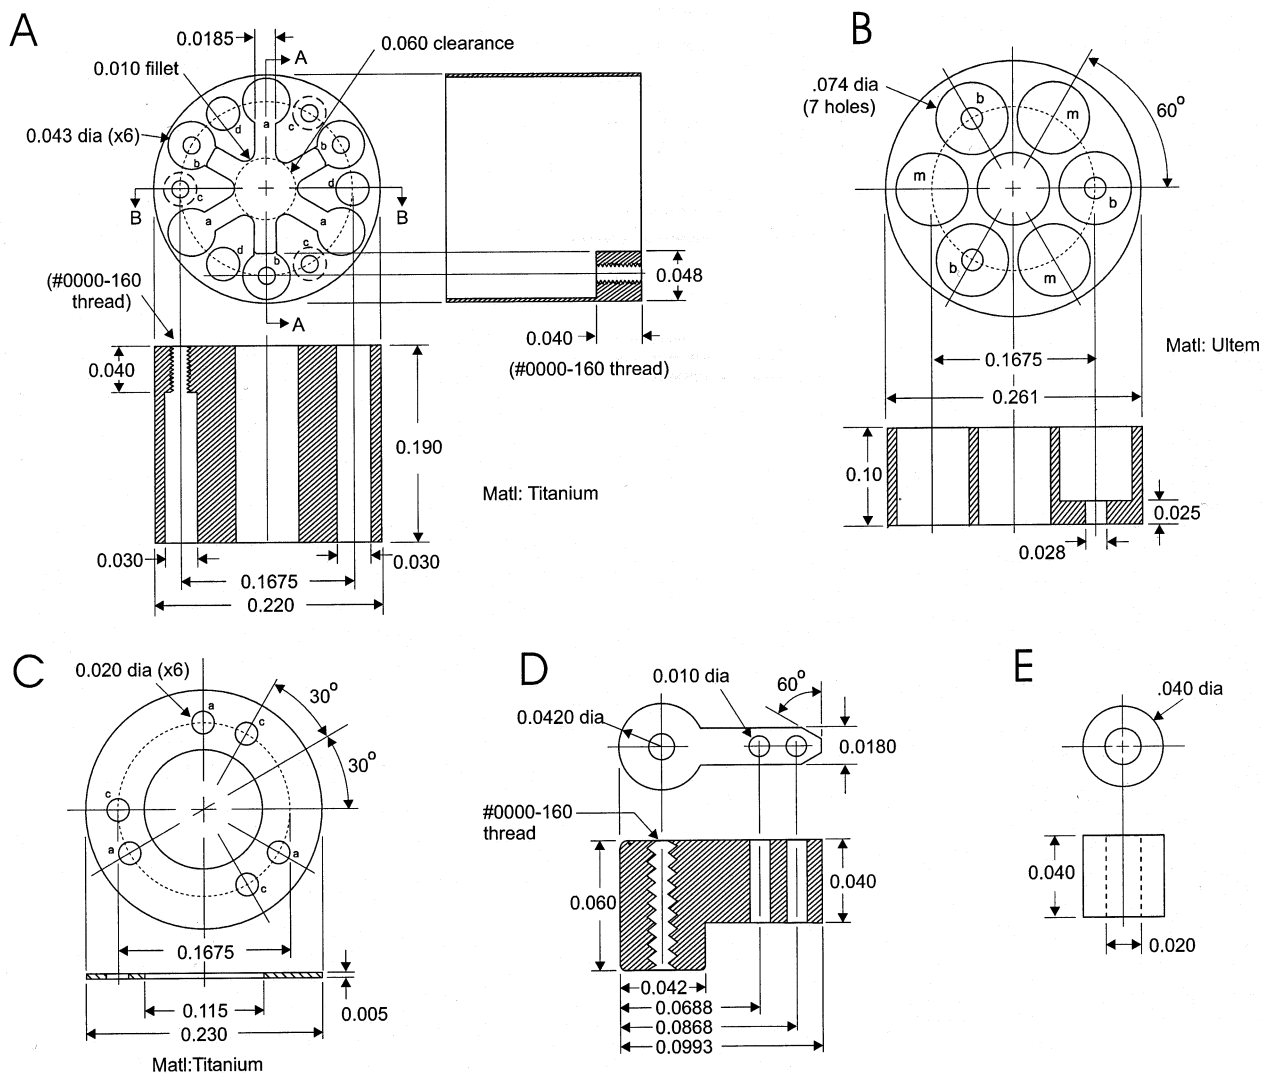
Machine drawings of microdrive components. (A) Microdrive body. The shuttles move in the three channels marked 'a'. The motor mounting plate mates to the right-hand surface of the section drawing A–A, and is attached using the threaded holes marked 'b'. The bottom plate mates to the top surface of the section drawing B–B and is attached using the threaded holes marked 'c'. Holes marked 'd' (0.030 dia) are for weight reduction only and may be omitted. (B) Motor mounting plate. The motors are press fit into the holes marked 'm'. Holes marked 'b' align with the 'b' holes in the microdrive body. (C) Bottom plate. Holes marked 'a' and 'c' align with the same labels in the microdrive body. (D) Shuttle. (E) The shaft coupling is used to attach the threaded rod to the motor shaft.
